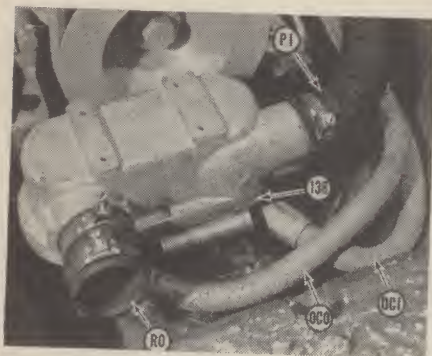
B—GM engine oil cooler which is located in tractor front frame is accessible after removing tractor radiator.
